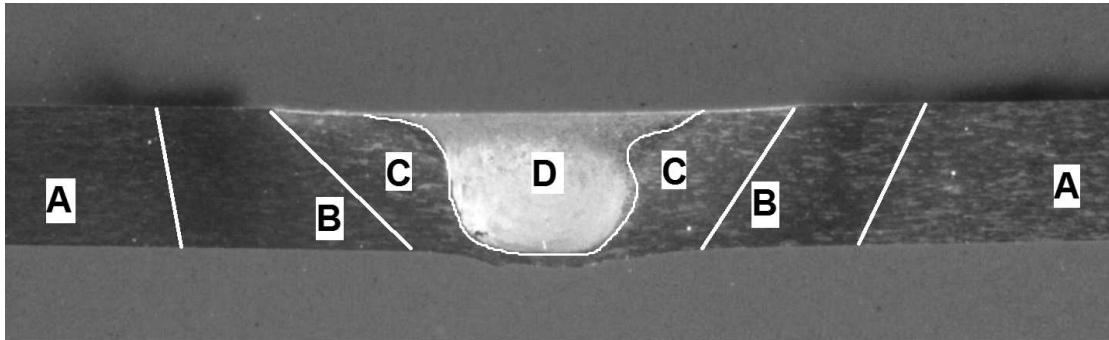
Various microstructural regions in the cross section of a friction stir weld. (A) Unaffected workpiece; (B) HAZ; (C) TMAZ; (D) Weld nugget or DRZ
